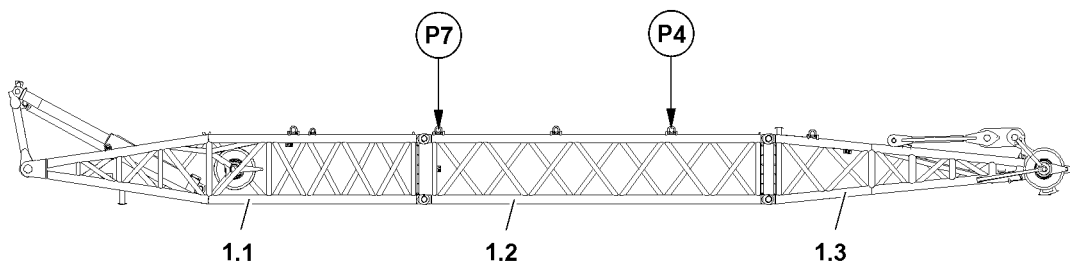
Fastening points for WA-frame 1 completely installed, long version
